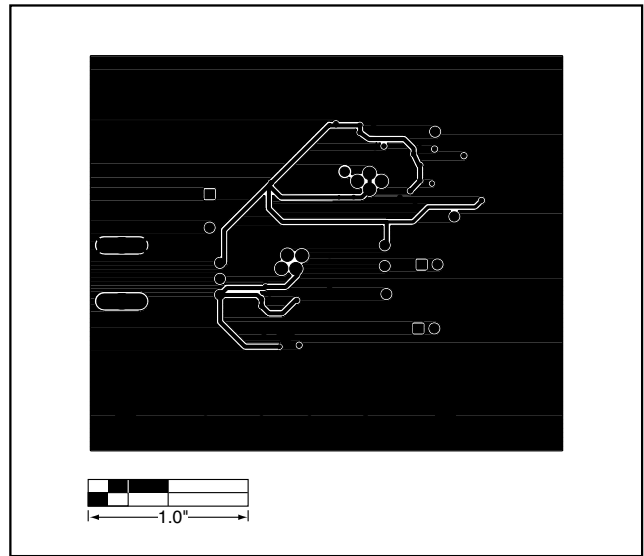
MAX3289 EV Kit PC Board Layout—Power Plane
